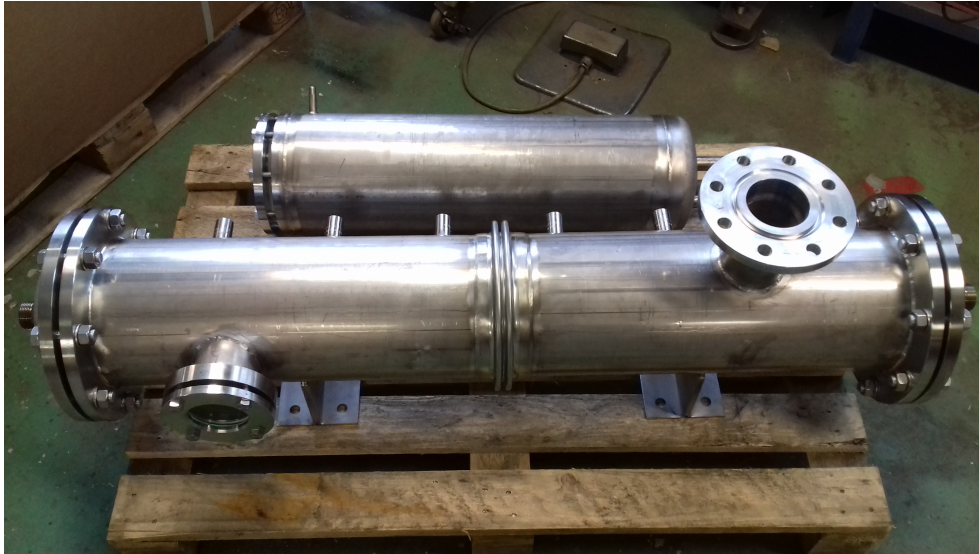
A photograph of the fabricated desorber (front) and of the solution tank (back)
